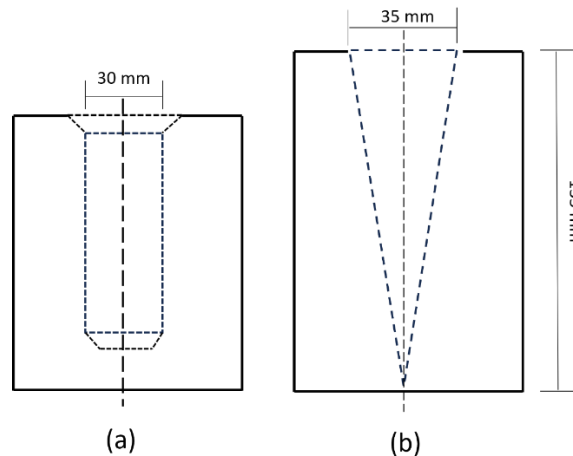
Illustration of (a) cylindrical and (b) wedge mould
